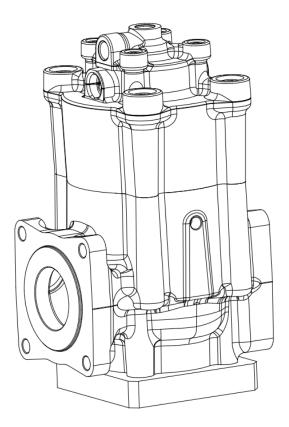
CO 3 way pneumatic valve size 2" (see Section12 for details about pneumatic connection)
